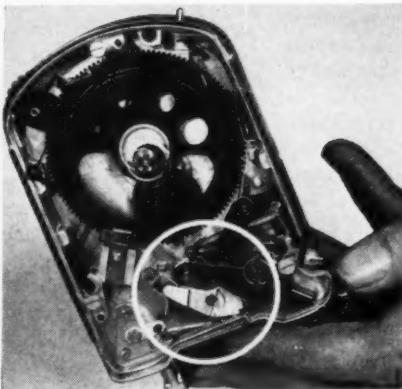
Camera-shutter mechanism. Circled is brass-powder tripper flywheel.
